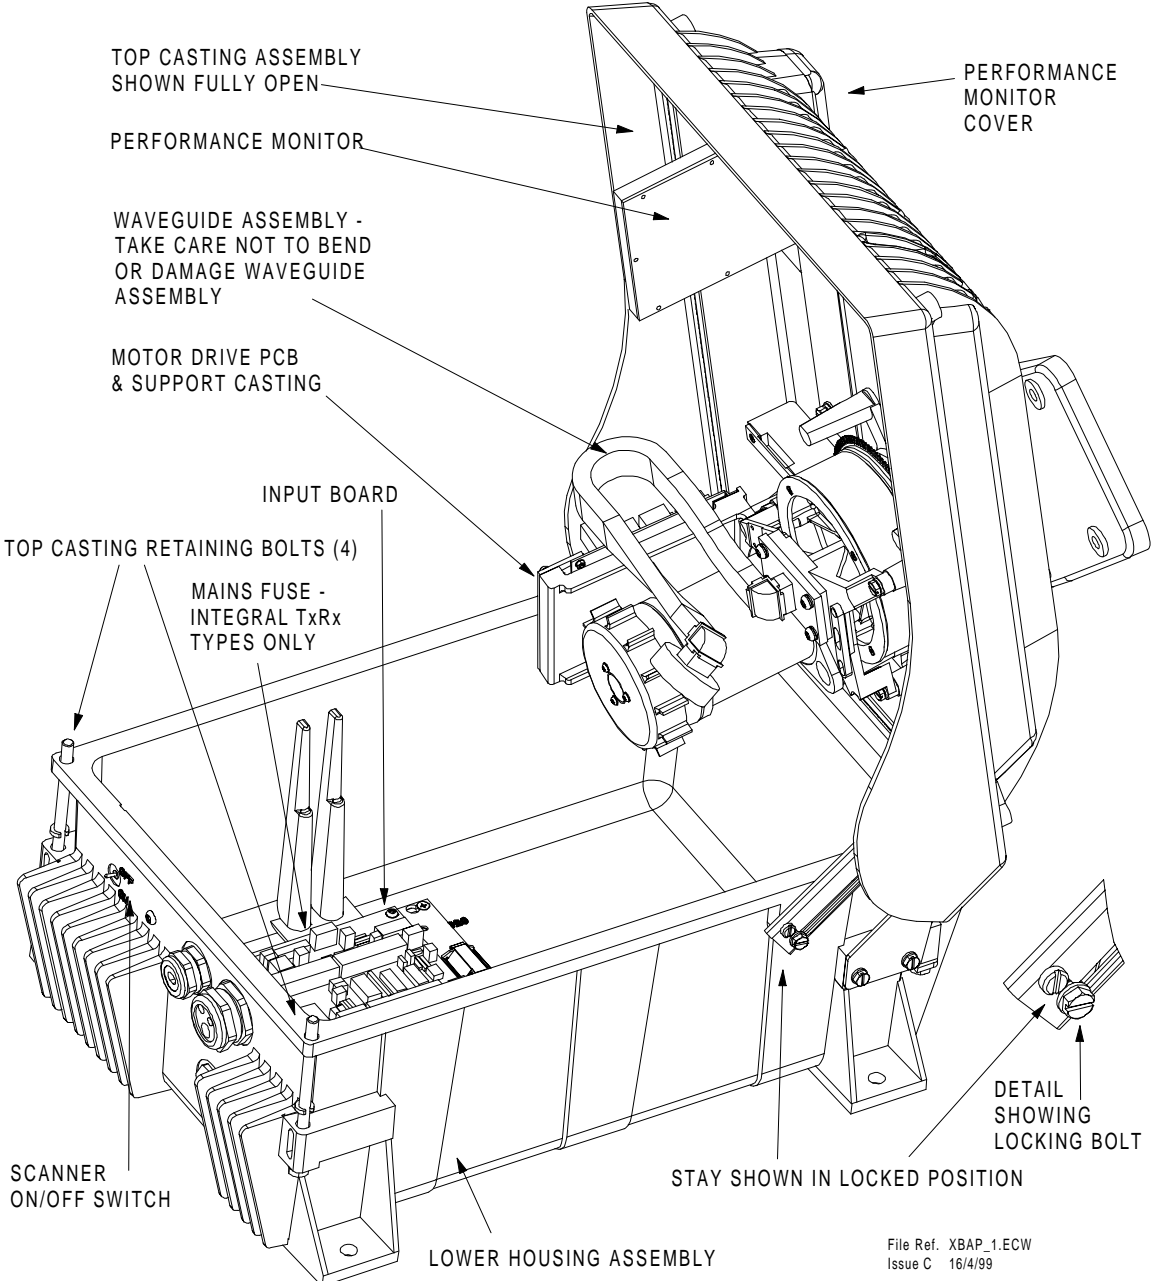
X-Band Bulkhead Turning Unit - View showing Main Assemblies
